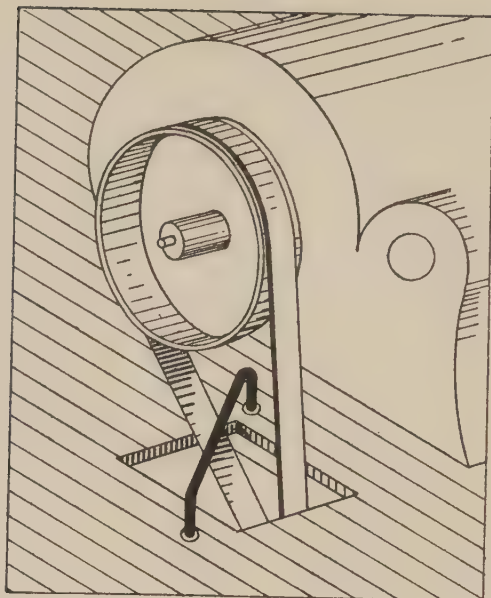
BELT PERCH AT FLOOR OPENING.
